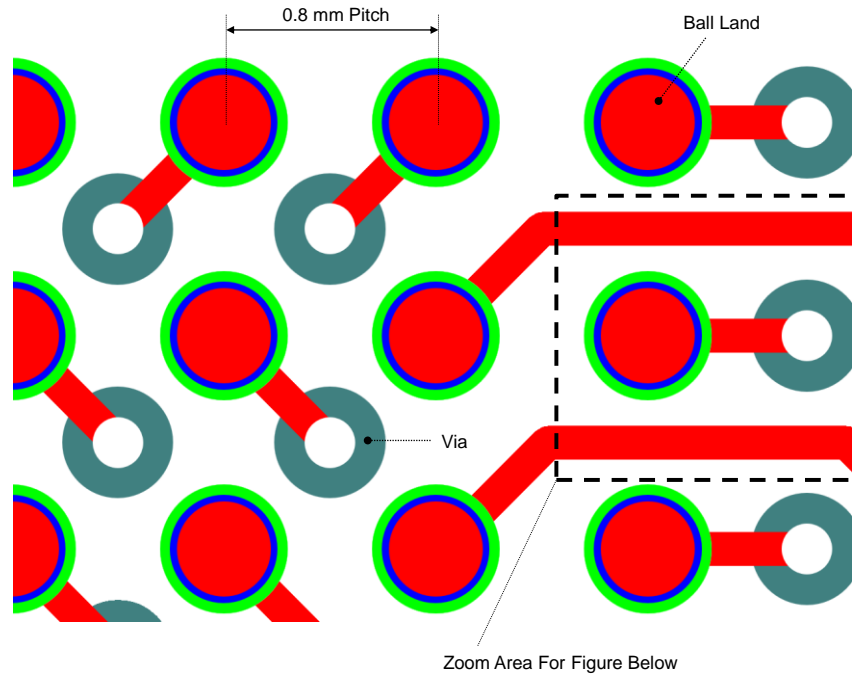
PRP Package Footprint Example – Medium Zoom
